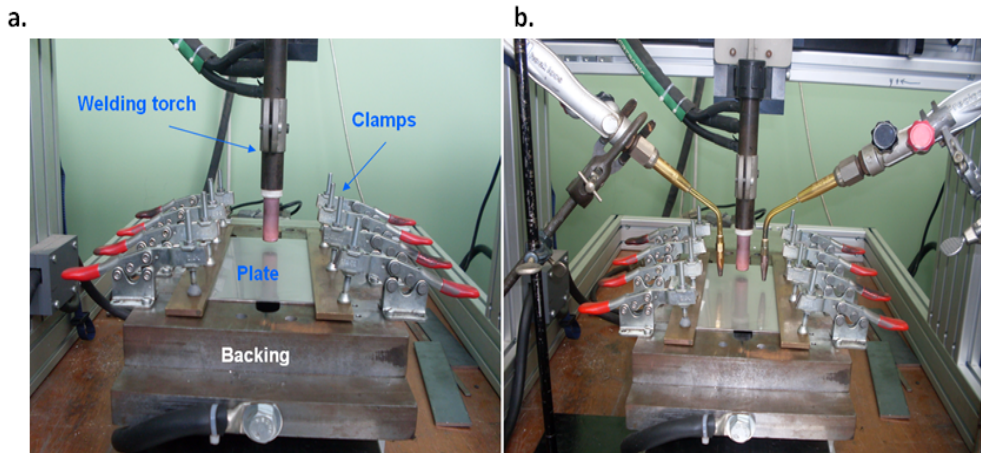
(a) Set-up for conventional welding and (b) welding with additional heating used in the first series of the experiments.
